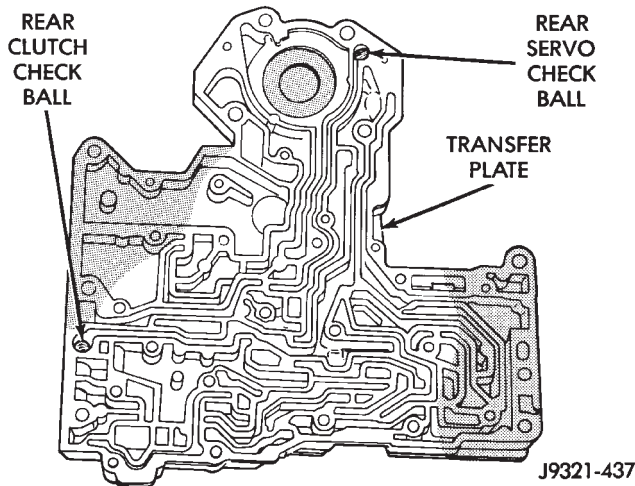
Rear Clutch And Rear Servo Check Ball Locations
